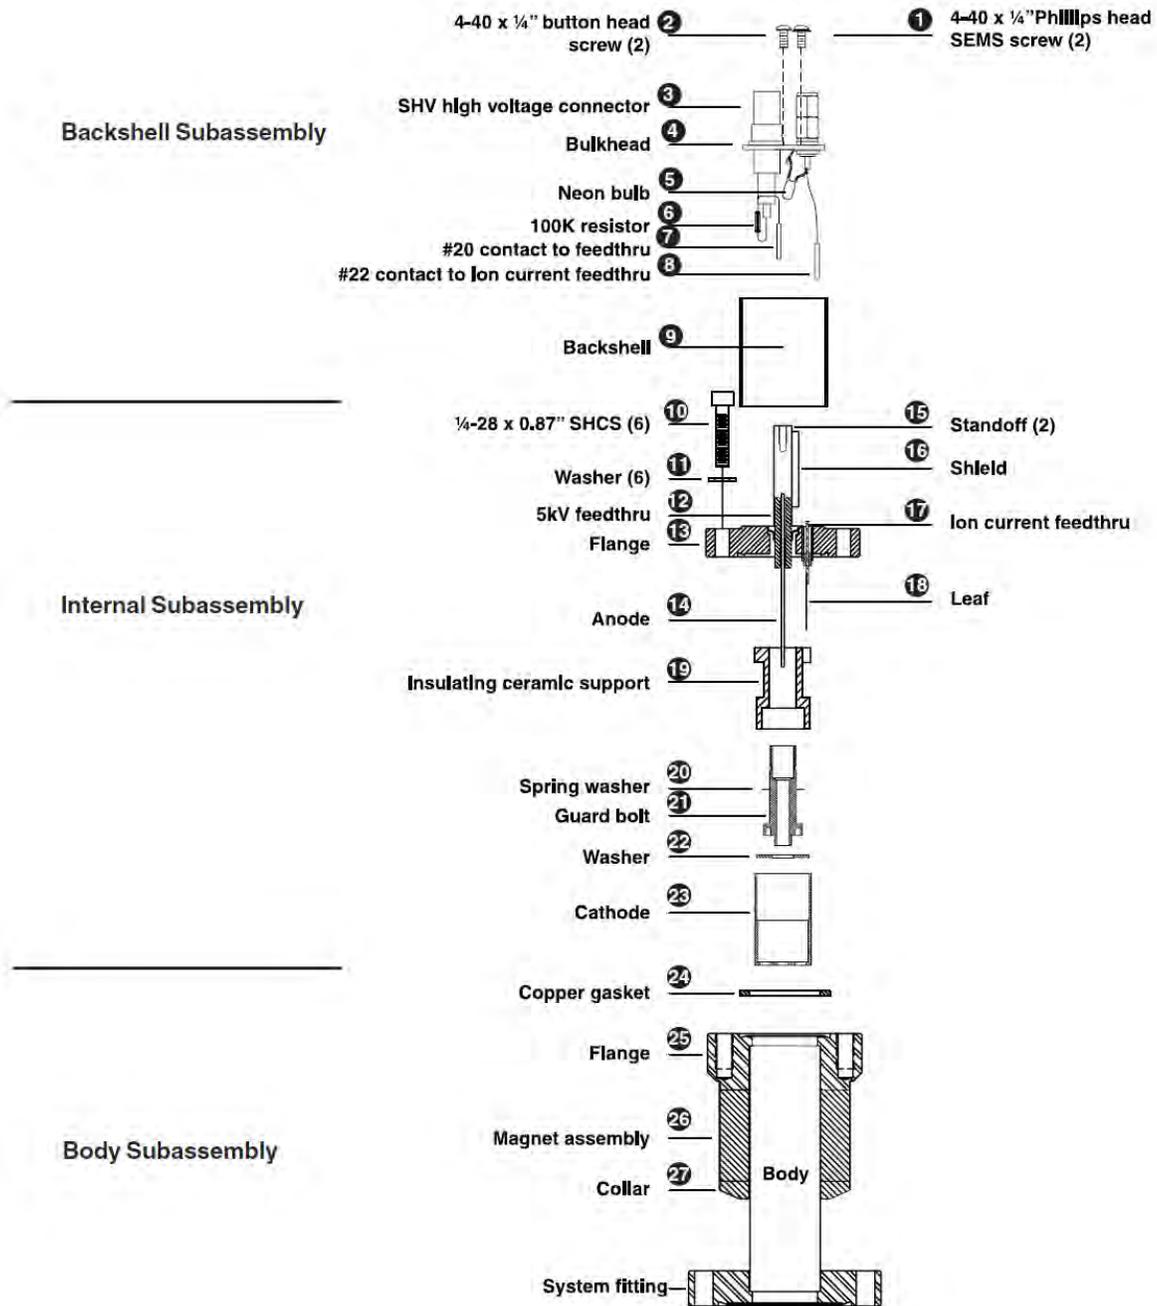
Exploded View of the 431/422 Cold Cathode Gauge Assembly
